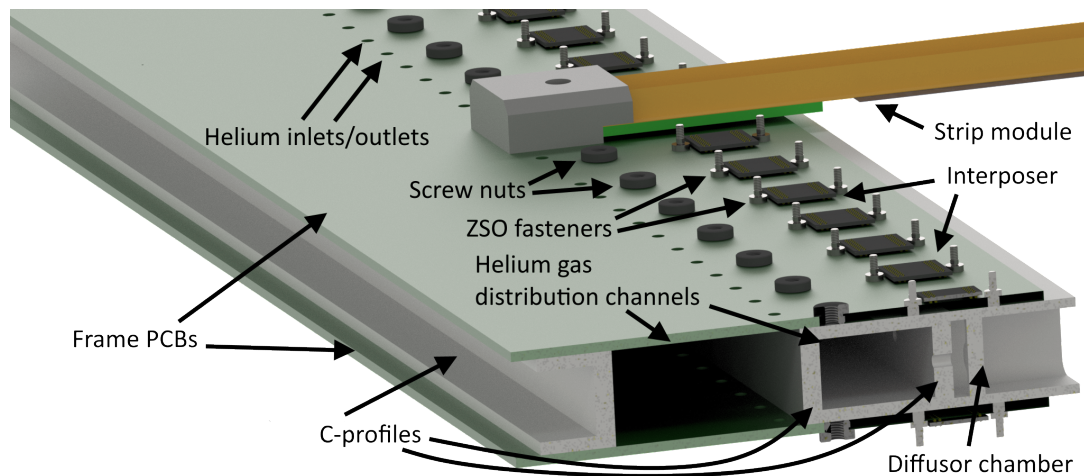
Cut view through frame side module with labeled components. One strip module is mounted for visualization. Only mechanically relevant parts are assembled, no electric components for readout and powering.
